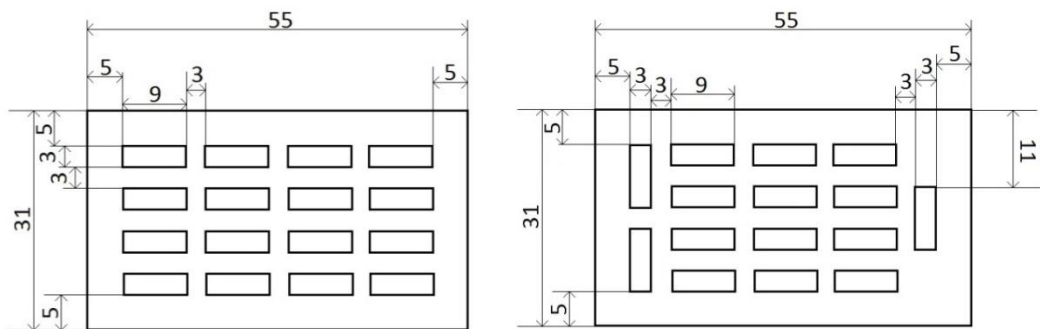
lower end design surface (Unit: mm) Figure 2-24: upper end design surface (Unit: mm)
